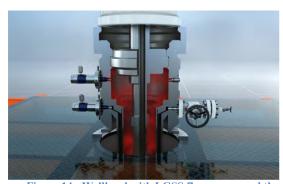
Wellhead with LGSS flange removed through incident and VR Safety Valve remaining as barrier
